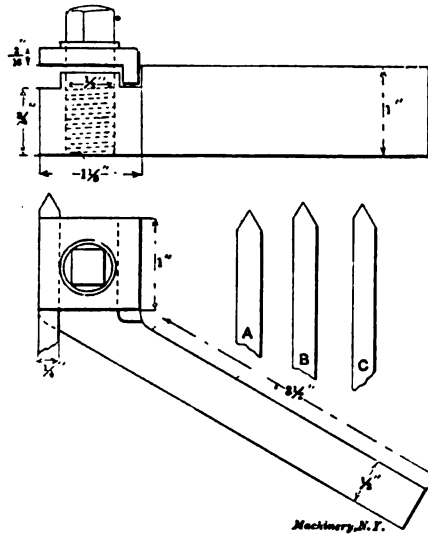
Thread Tool Holder for High Speed Steel Tools.
